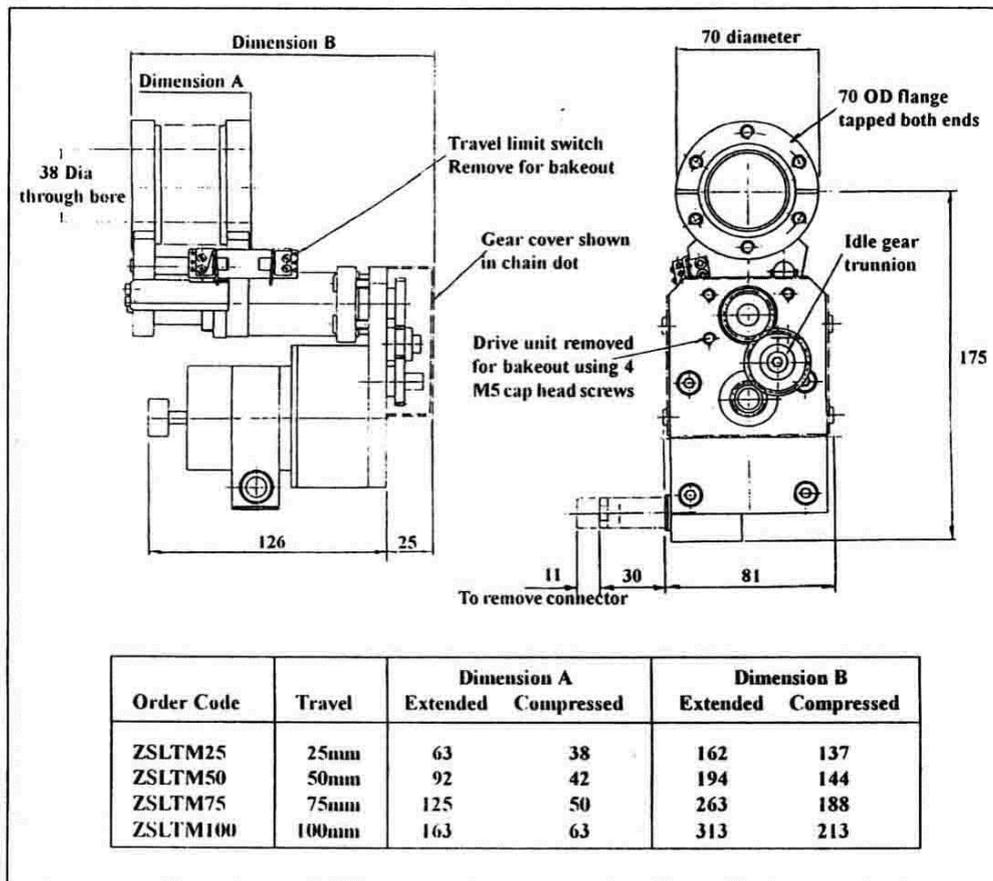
The SLTM stepper motor driven linear transfer mechanism
